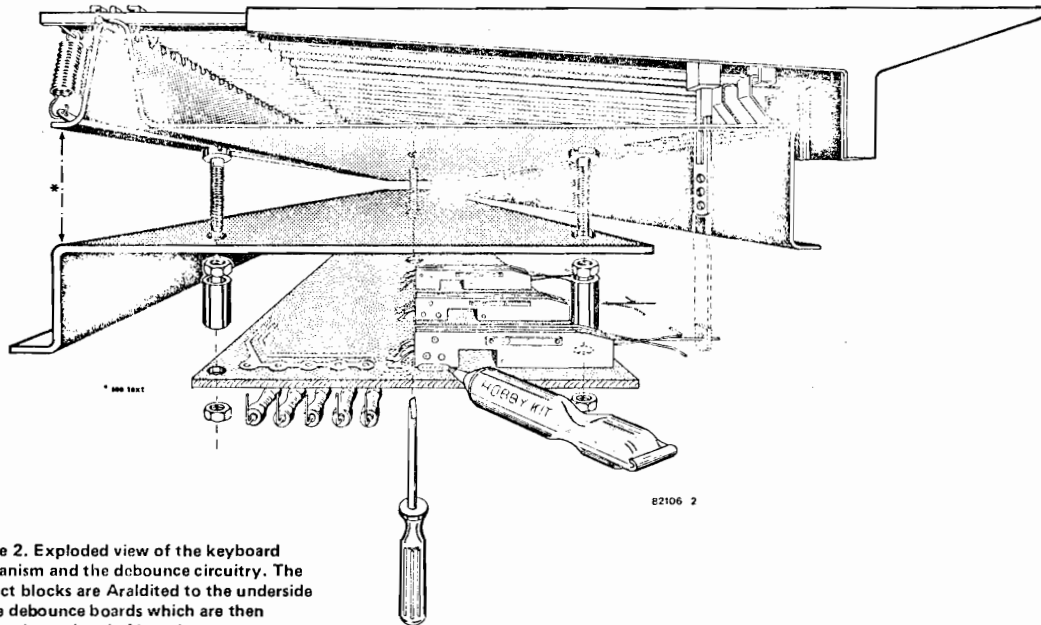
Exploded view of the keyboard mechanism and the debounce circuitry. The contact blocks are Araldited to the underside of the debounce boards which are then mounted on a 'carrier' board.
